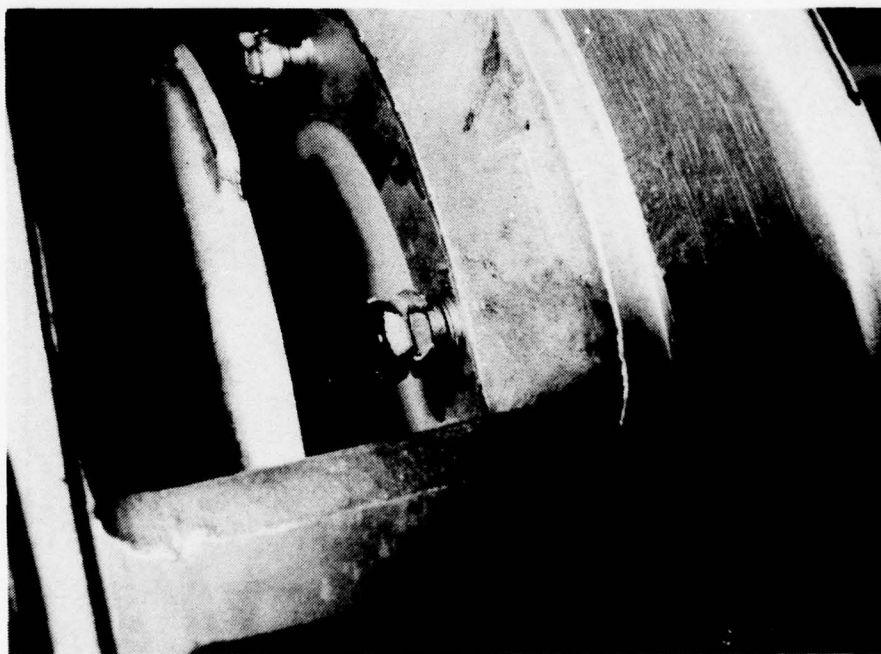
Belleville Washer and Locknut Method of Fastening Nozzle D-Bolts to Compressor Housing
